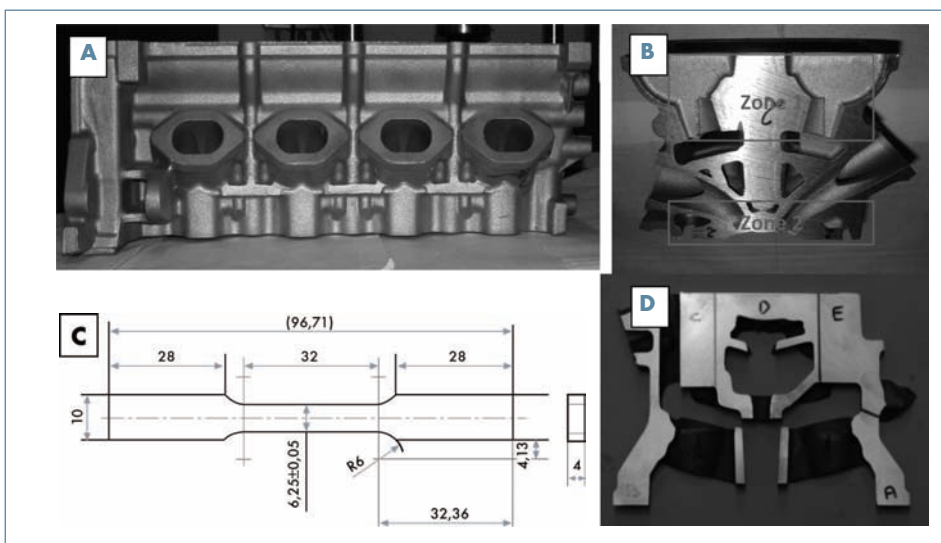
The cylinder head (a); examples of zones of extraction of tensile test specimens (b); dimensions of tensile test specimens (c); a section of the casting used for microstructural characterization.
